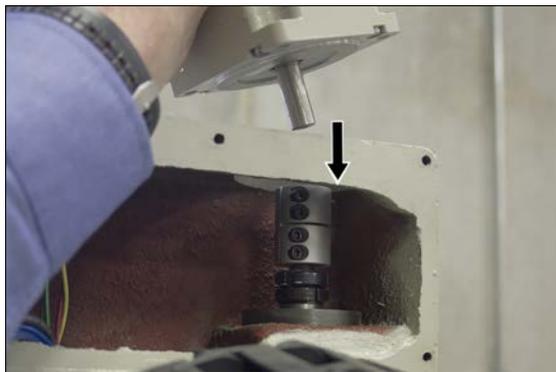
Example of a Z-axis motor installation into a Z-axis motor coupler.
